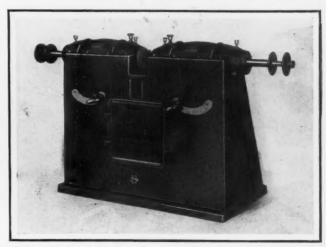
Selective-speed Motor-in-the-base Buffing and Polishing Machines
